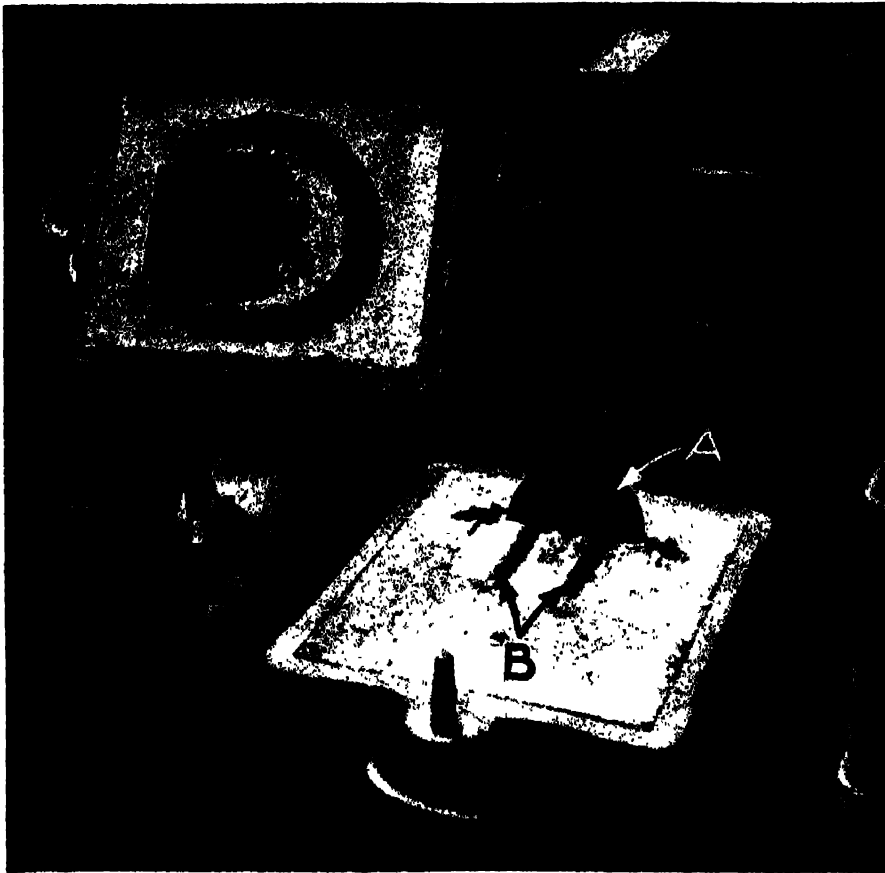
MOLDS ARE CAST FACE DOWN WITH THE BODY OF THE CASTING IN THE COPE THE MOLD SHOWN IS FOR A DOUBLE BOTTLE MOLD
